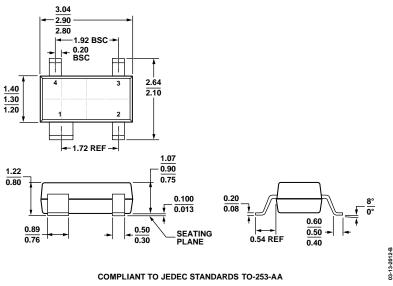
4-Lead Small Outline Transistor Package [SOT-143] (RA-4) Dimensions shown in millimeters
